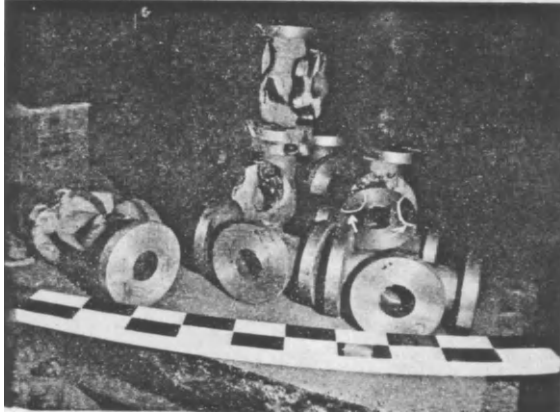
The same pattern of porosity as in Fig. 447 is shown by these valve casings, which in this case were manufactured without exothermic pads, using conventional wedge pads.
